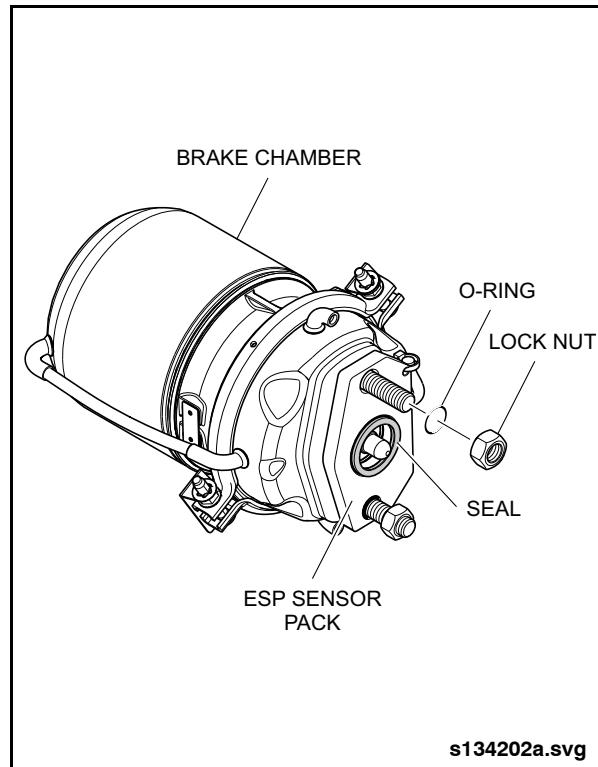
Rear Brake Chamber ESP Sensor Pack
